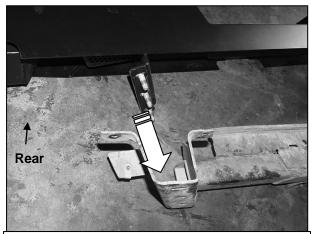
On models without receiver hitch, reuse triple bolt plate to attach bumper to end of frame
